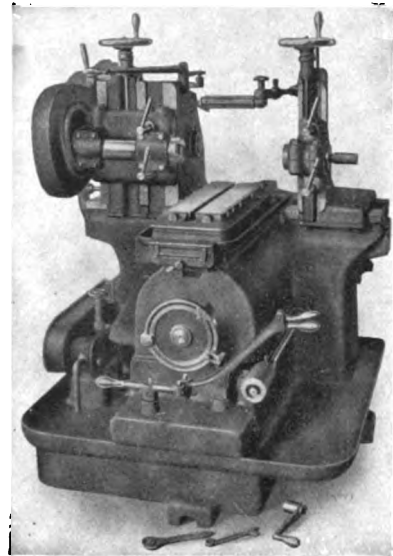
10-In. (254 mm.) Automatic Milling Machine
